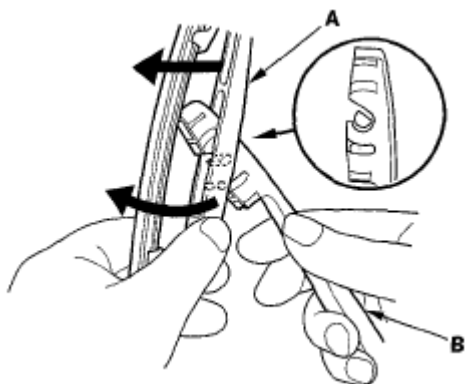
Identifying Wiper Blade From Rear Wiper Arm
